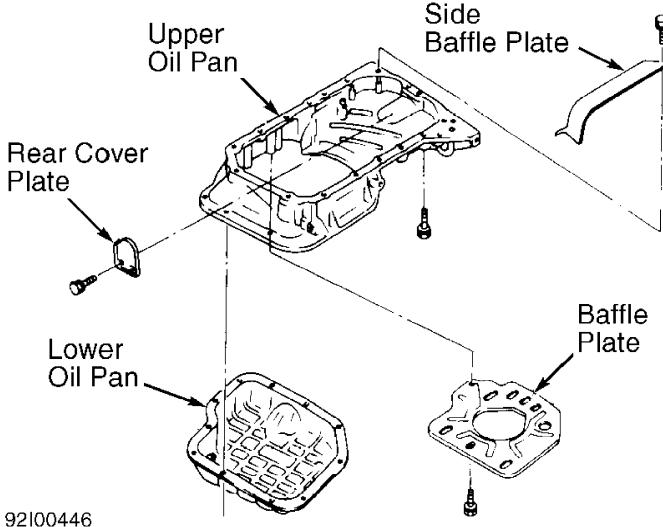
Exploded View of Oil Pan Assembly Courtesy of Nissan Motor Co., U.S.A.
